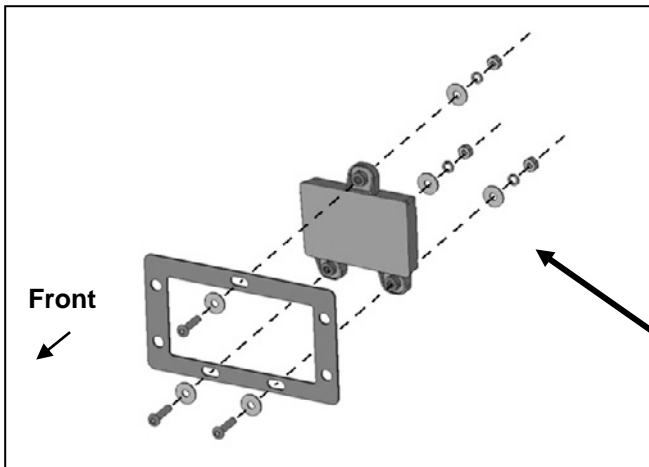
Unplug harness leading to shutter assembly in grille. Remove grille assembly
